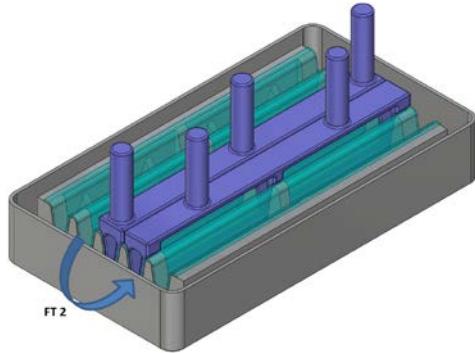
Filter Tool 2 Removal & Insert into 4th Slot
